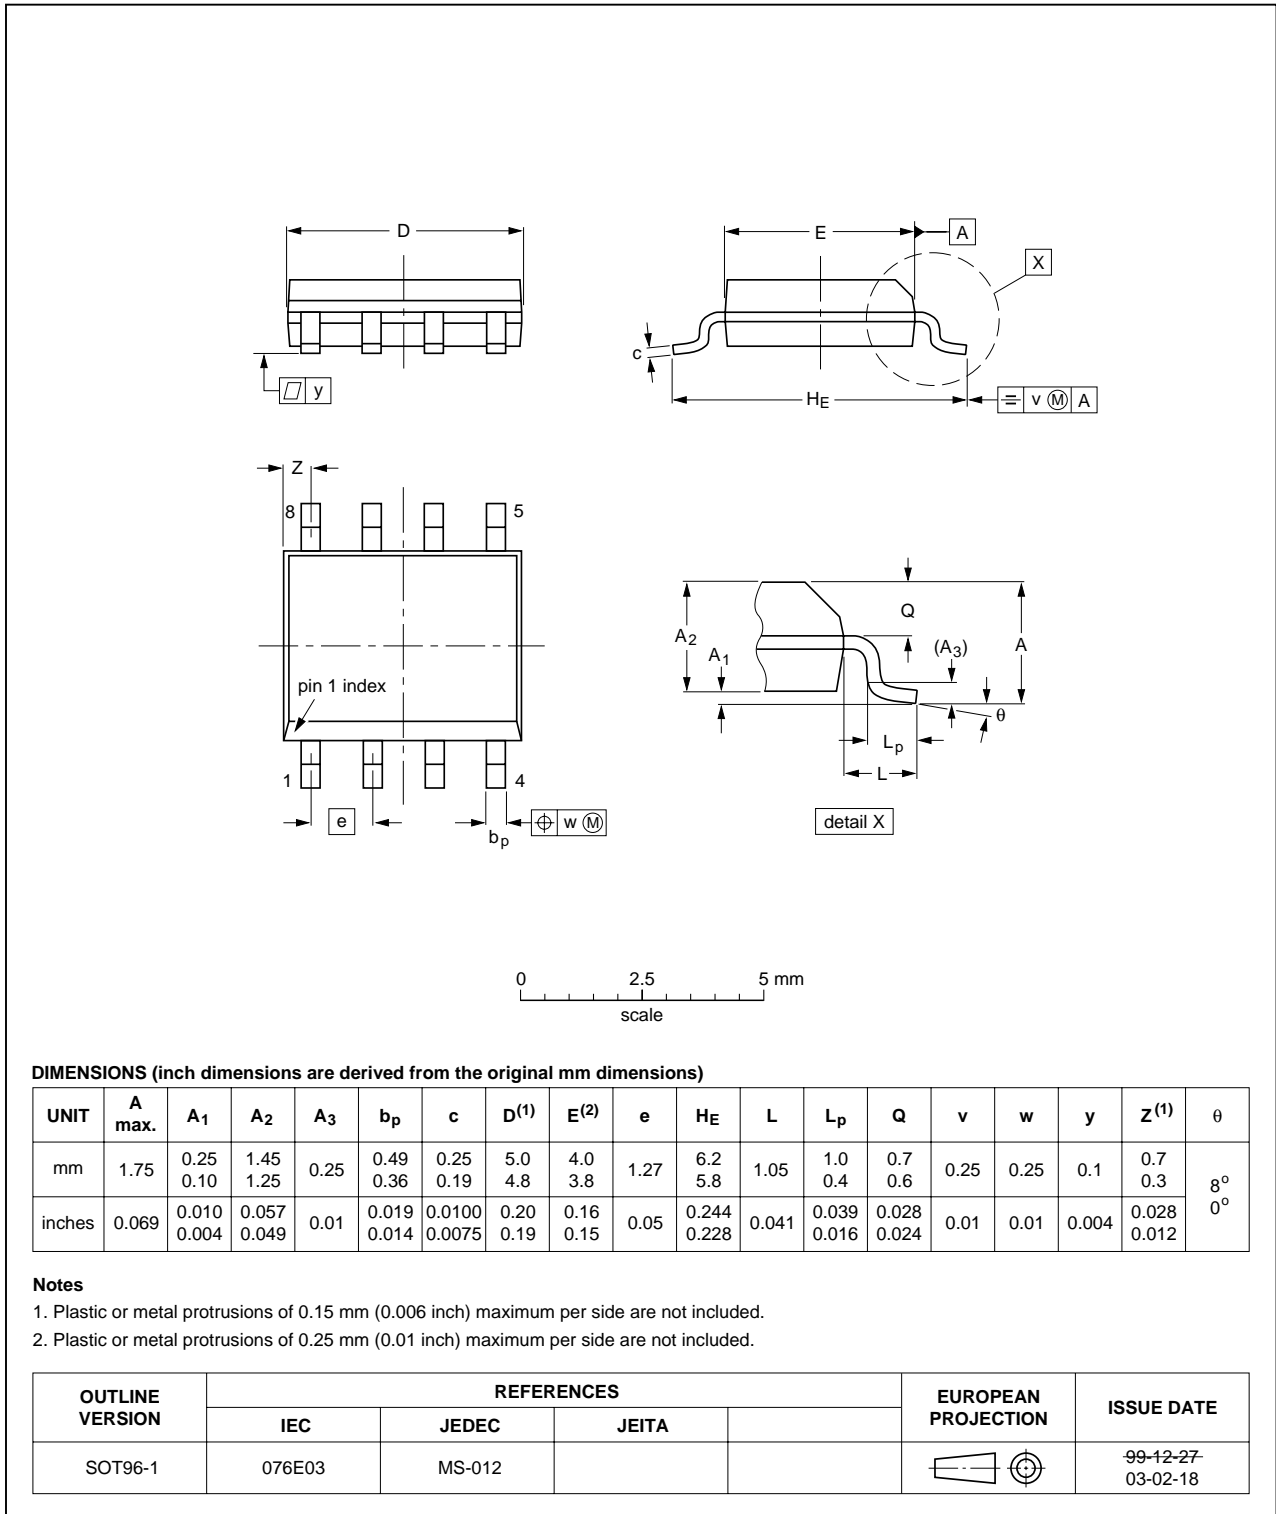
Package outline SOT96-1 (SO8/MS-012)
